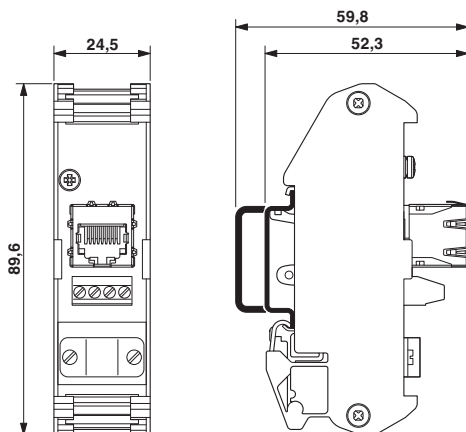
Dimensions FL-CAT5 TERMINAL BOX
